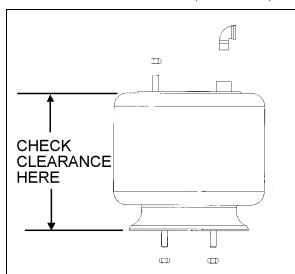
TYPICAL AIR SPRING CLEARANCE
